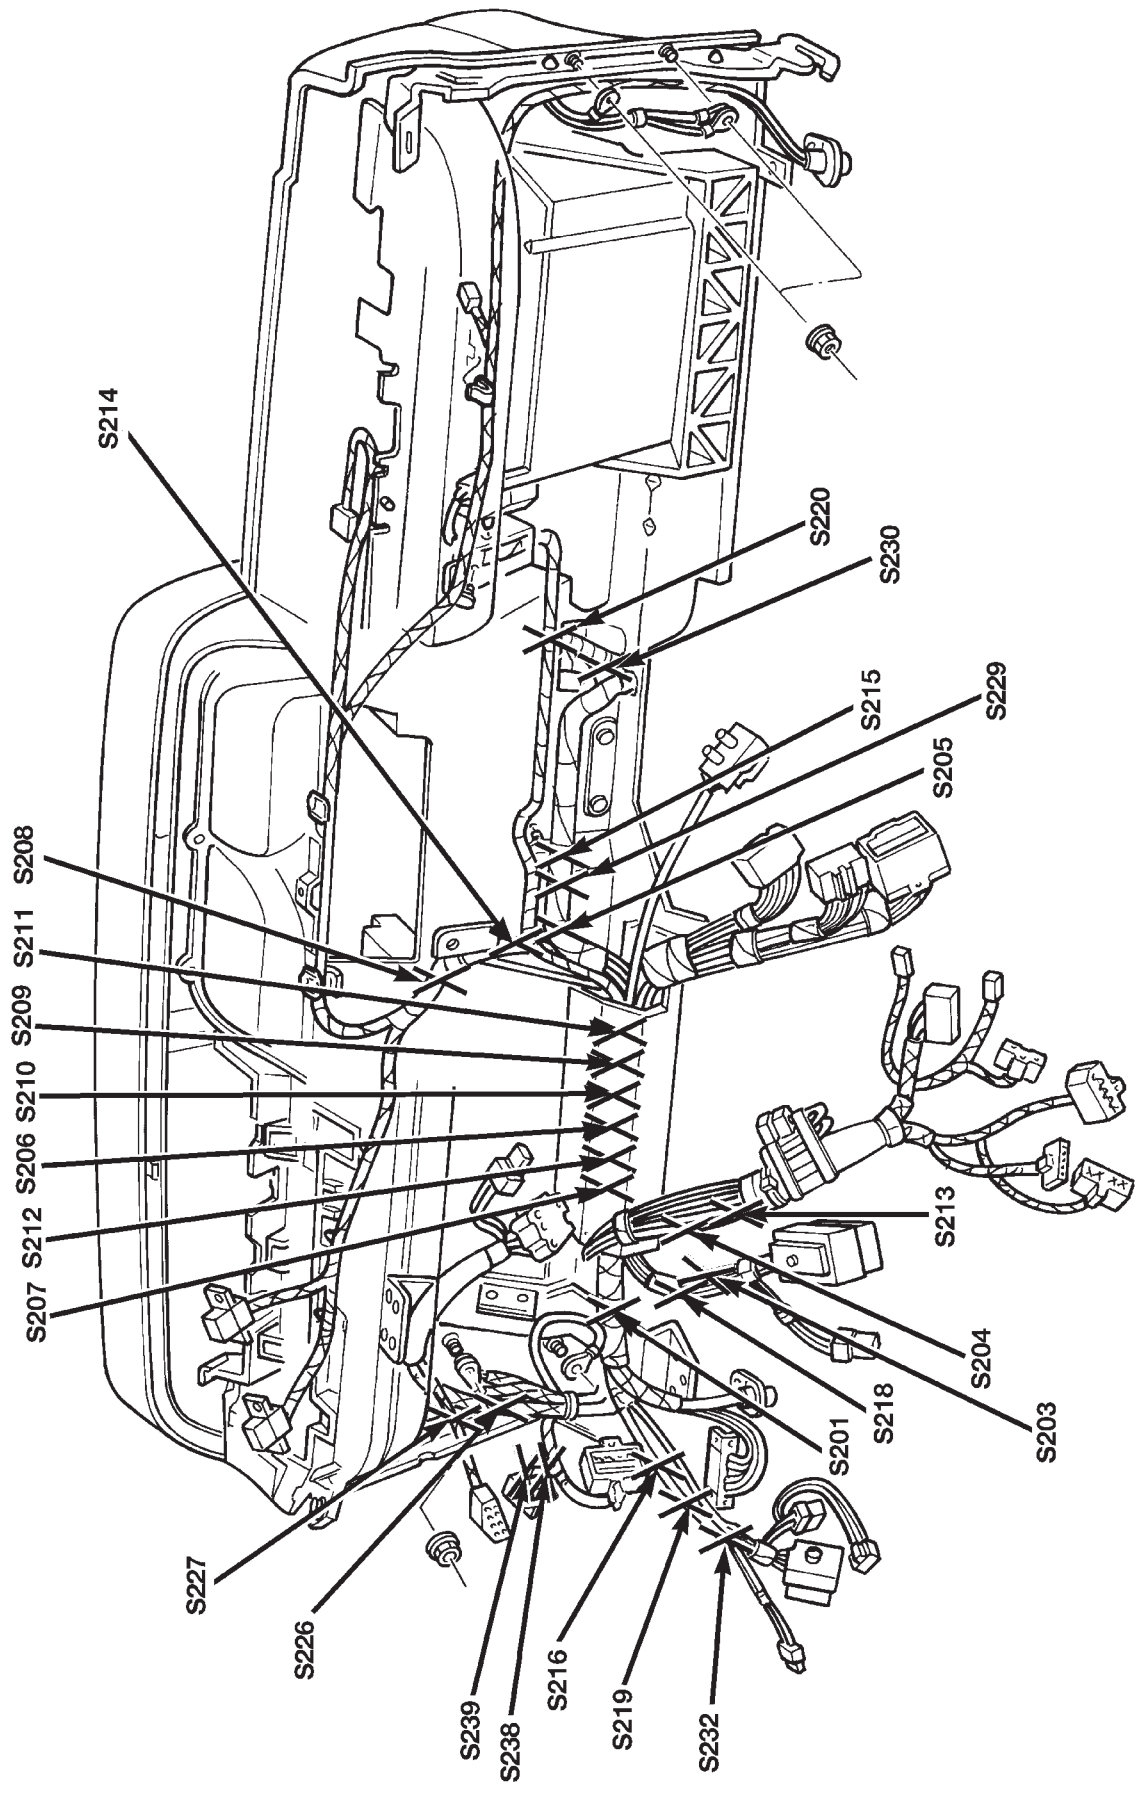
INSTRUMENT PANEL WIRING SPLICES, RHD
